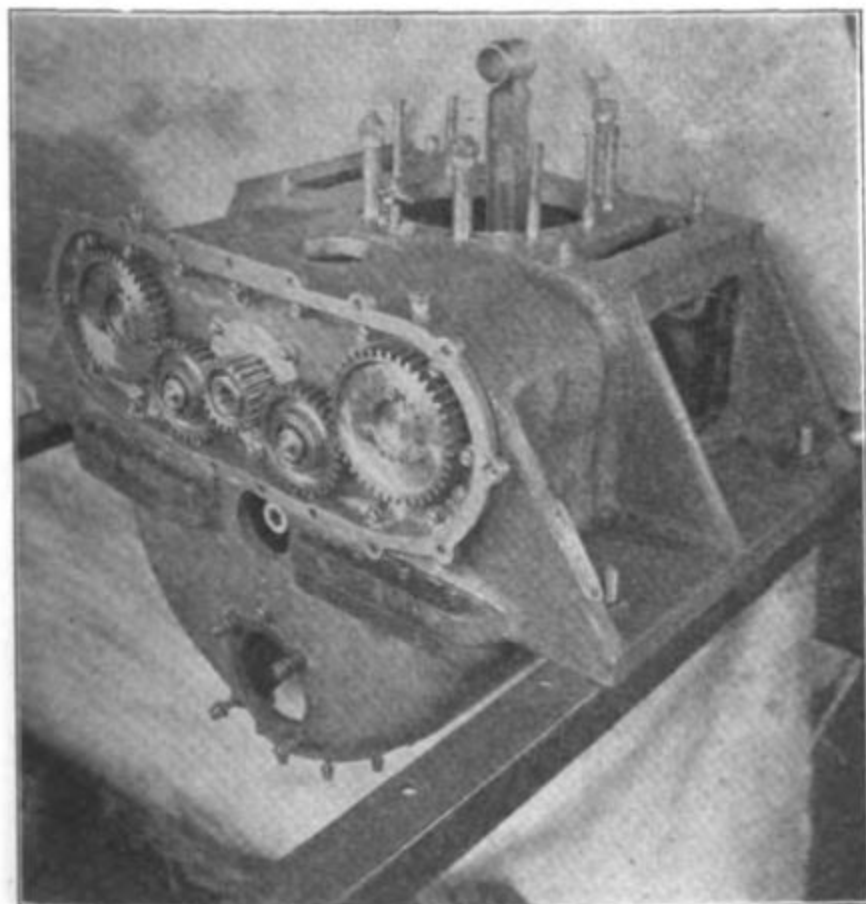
TIMING END WITH MAGNETO HOUSING REMOVED
